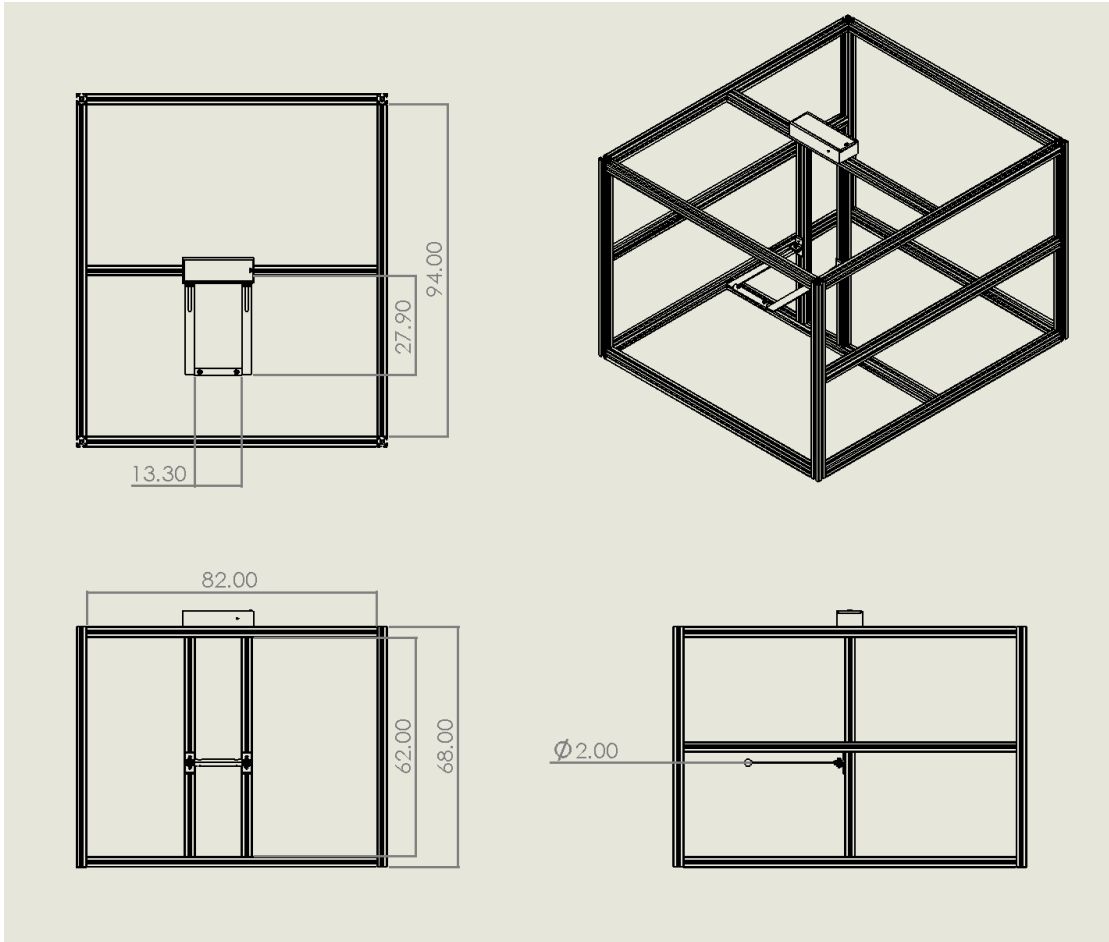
Dimensions in millimeters of Frame, Cantilever and Cylinder
